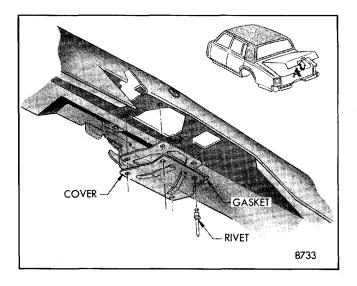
Lock Cylinder Access Hole Cover K Style
